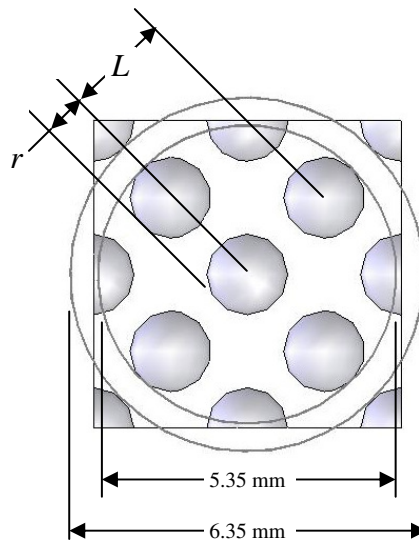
End view of rod with inner and outer diameters of the prototype rod shown superimposed on the FCC porous structure
